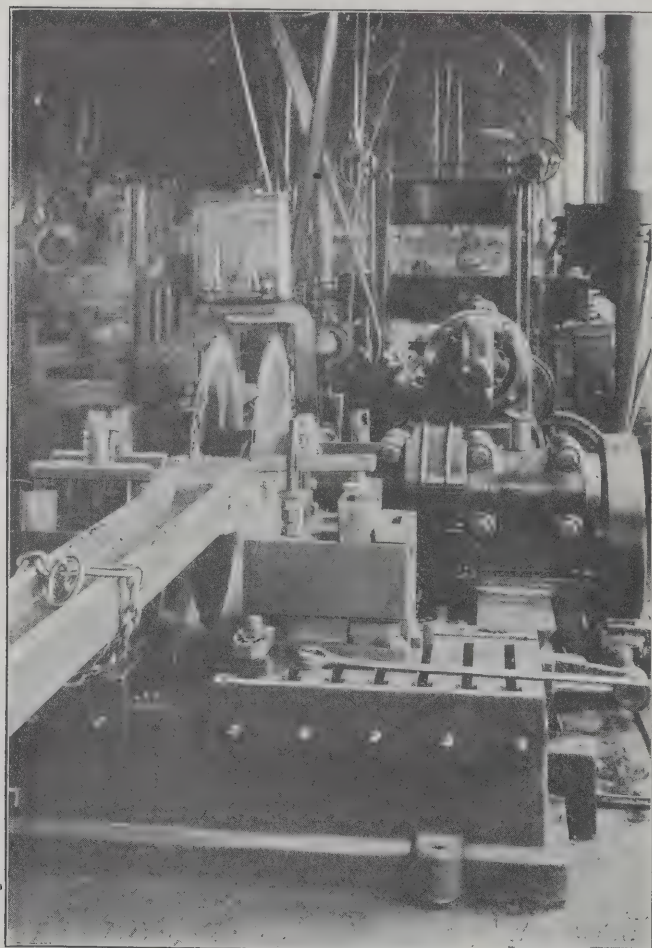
Cutting out the Jaws for the Open End of the Rod in a Double-blade Sawing Machine
